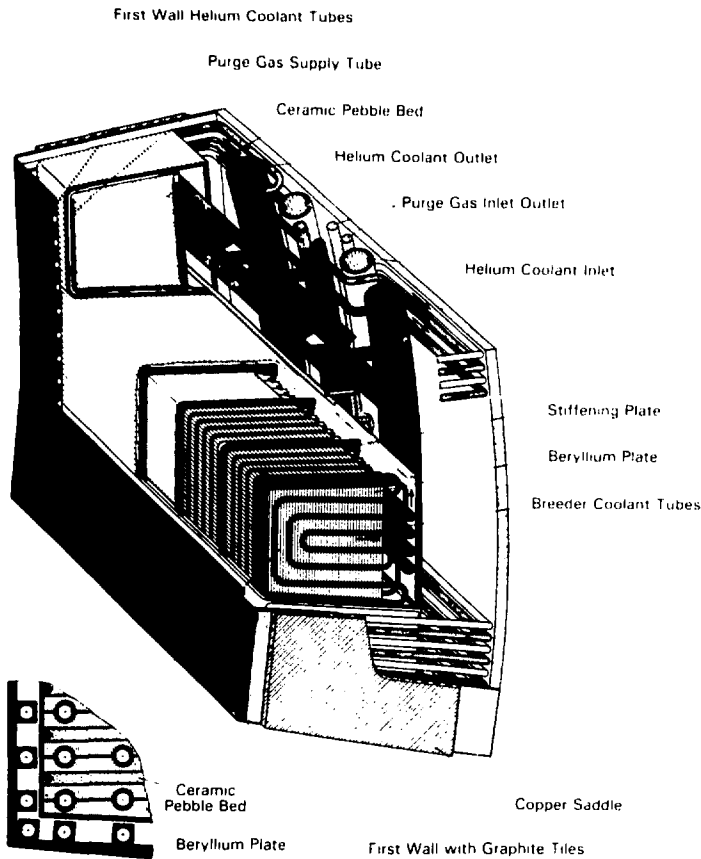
Breeder Out of Tube (BOT) Blanket Concept; View of Outboard Blanket Canisters [5]
